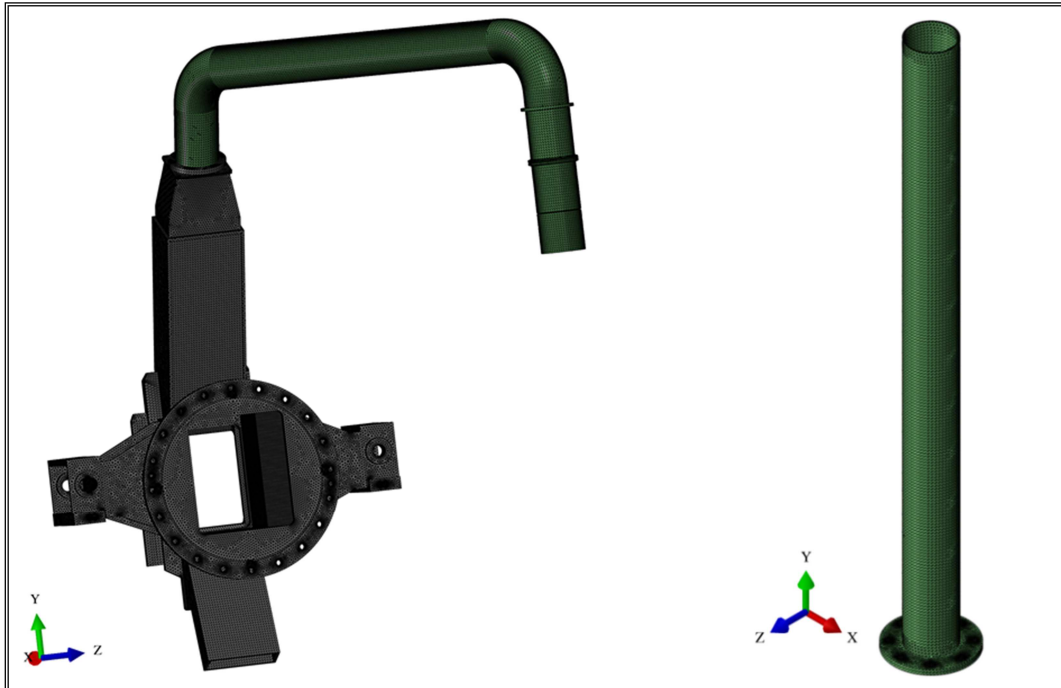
Mock-up FEM model. Target Assembly and Lithium inlet pipe exploded view.
